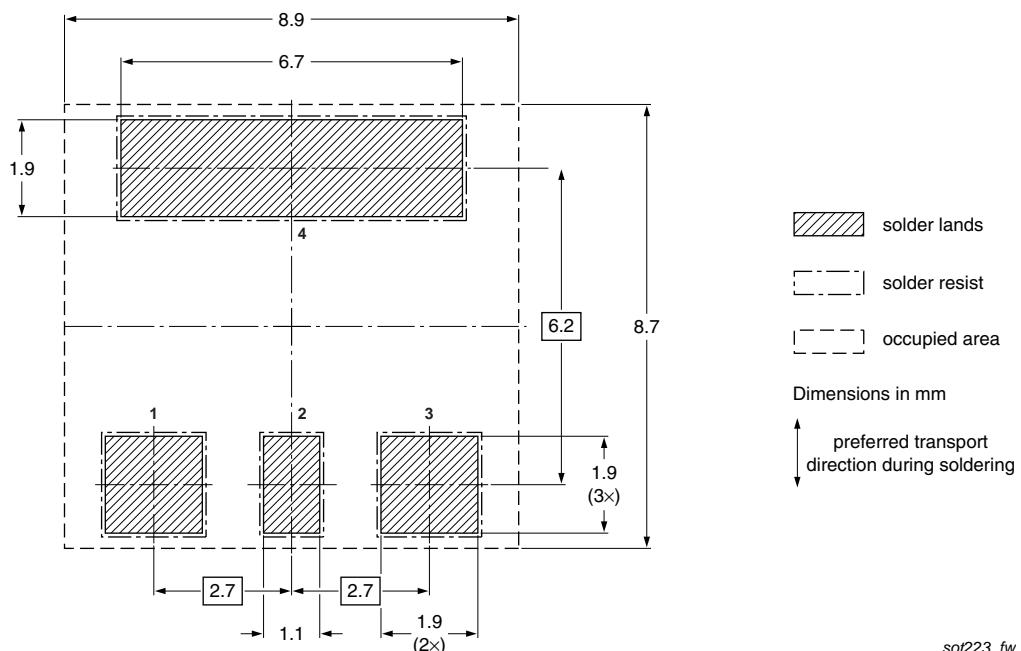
Wave soldering footprint for SOT223 (SC-73)
